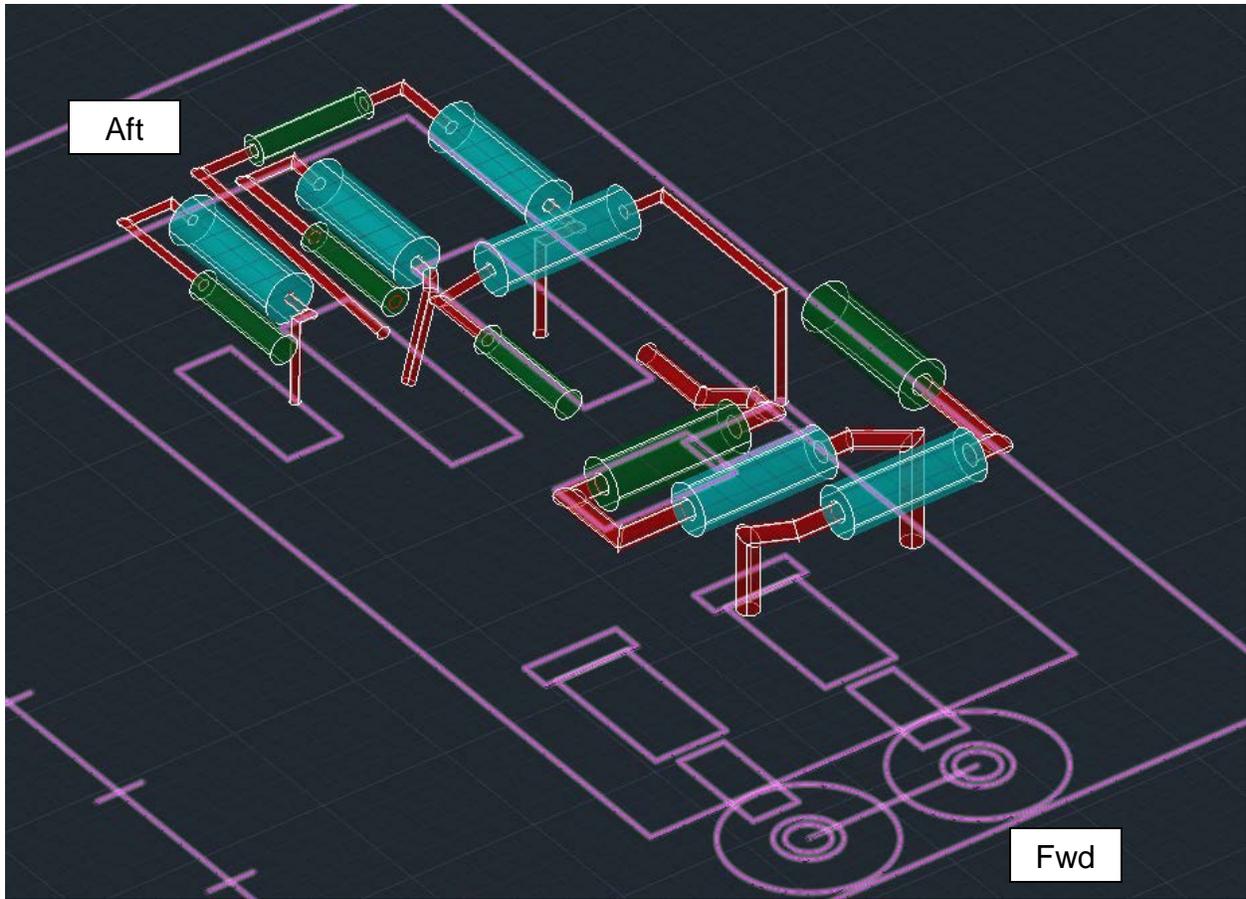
Barge Port Engine Room Retrofit Arrangement with Point Cloud Suppressed
